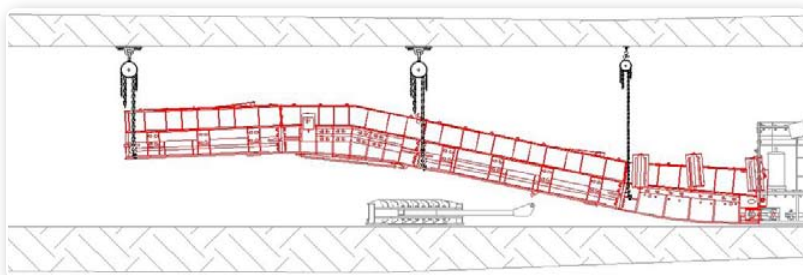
Conventional BSL Outbye sections installation using elephant feet and 10t chain blocks
